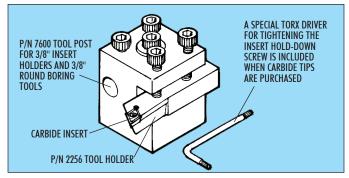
Carbide insert tool and tool post. The tool post holds both 3/8" square and round tools.
